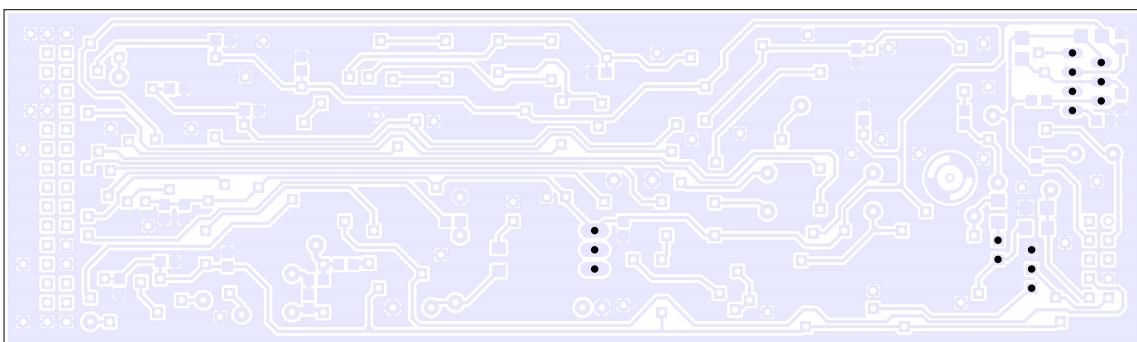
Board top view showing connectors, test points, vias and wired components
